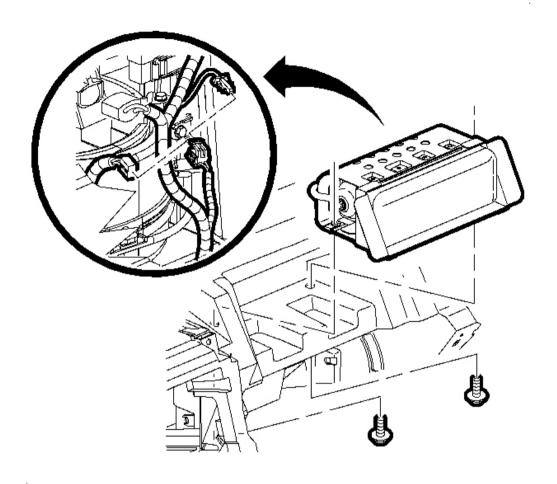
Module & I/P Carrier Retainers Courtesy of GENERAL MOTORS CORP.
